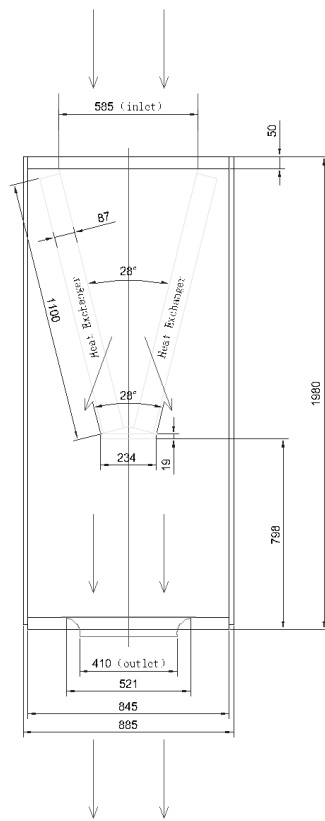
Dimensions of the V-shaped Evaporator Used in Study
